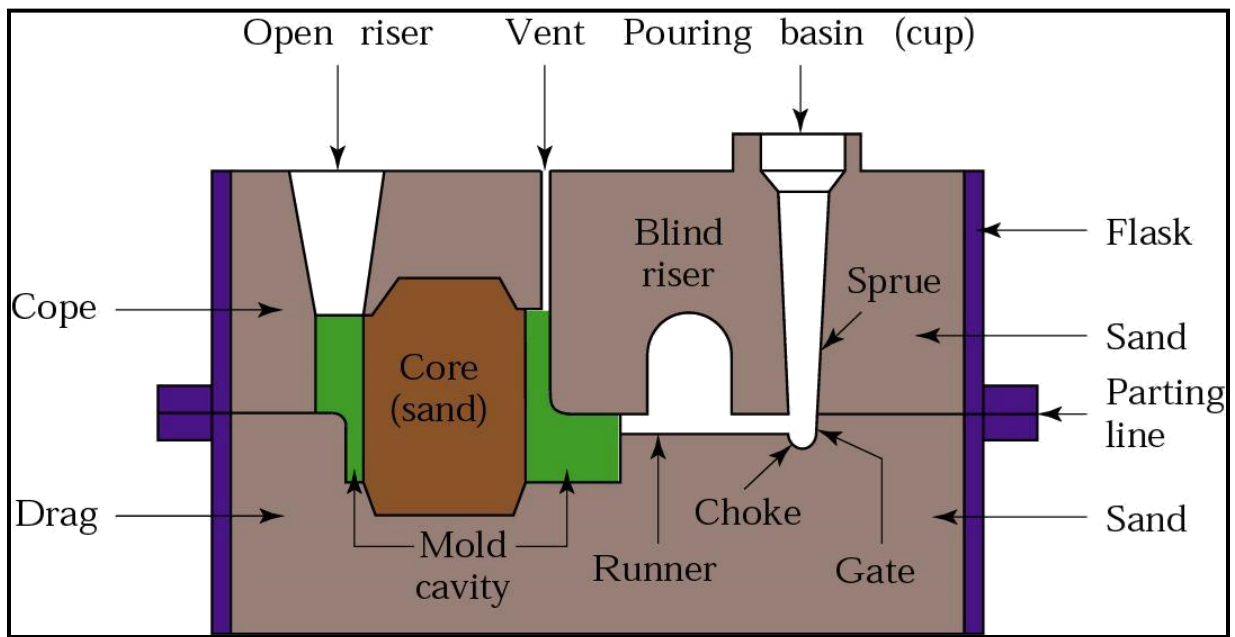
Cross-section of a typical two-part sand mould, indicating various mould components and terminology.
